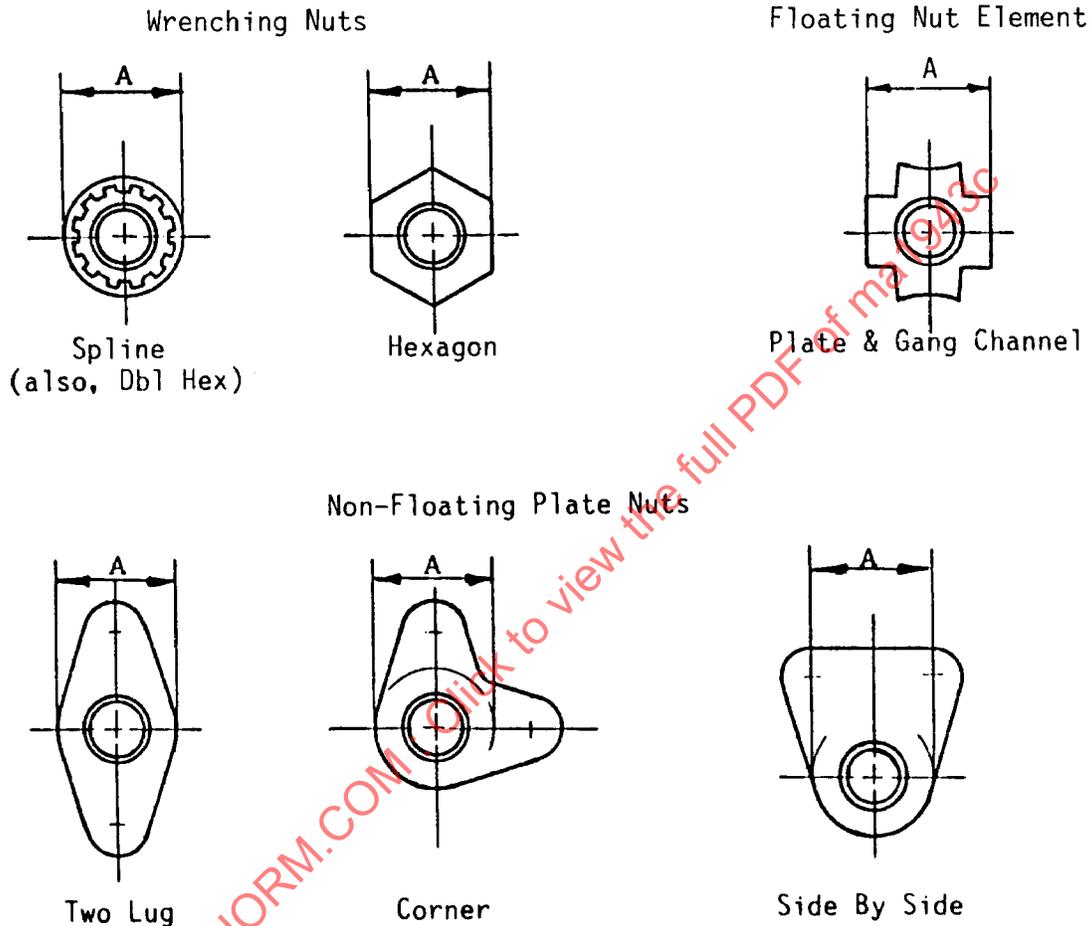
Bearing surface area "A" under perpendicularity control for various types of nuts
